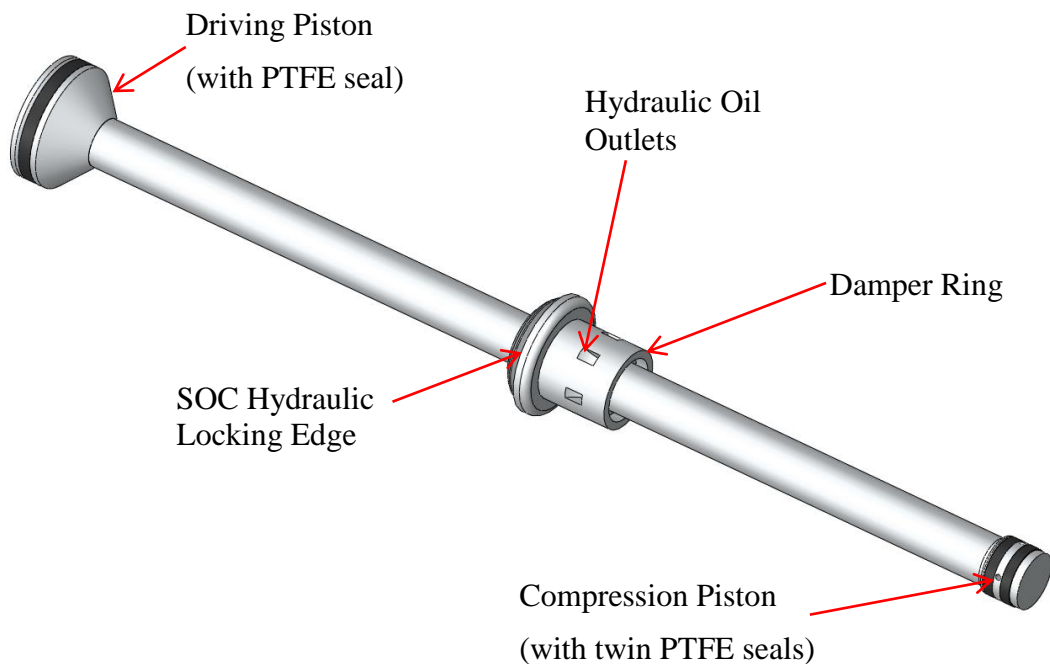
SolidWorks model of Leeds RCM piston rod assembly.
